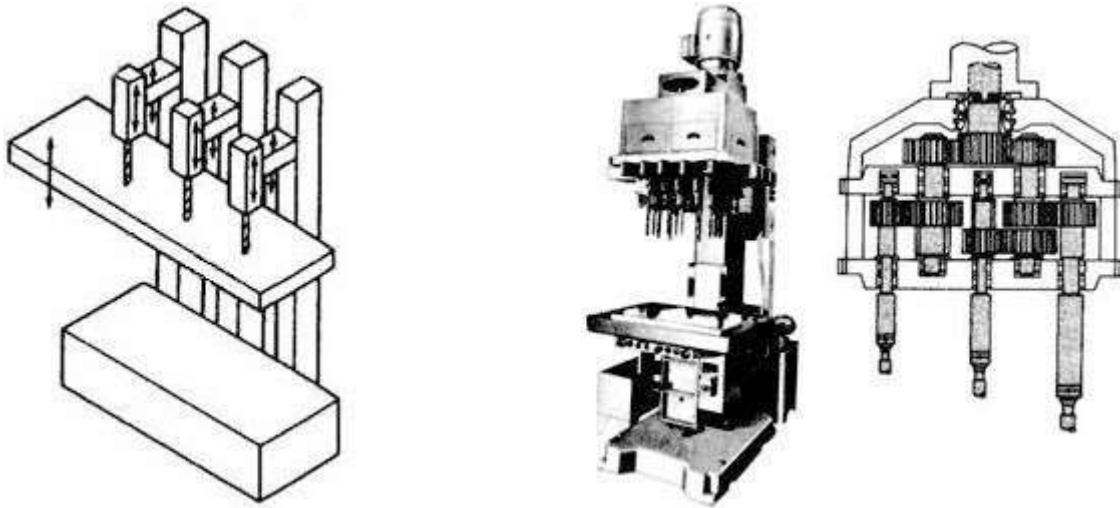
Gang drilling machine Fig. 3.116 Multiple spindle drilling machine
